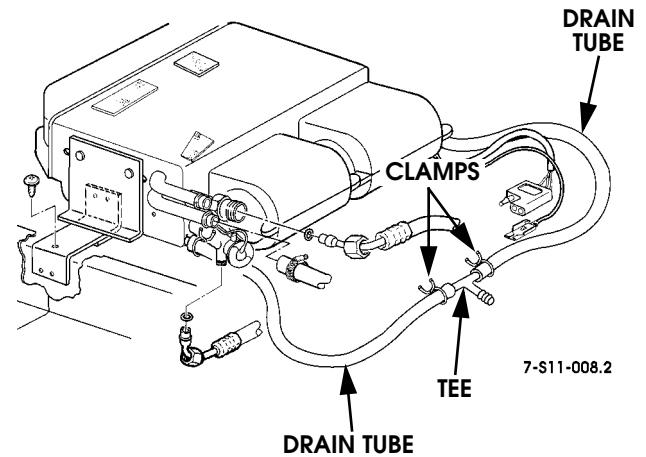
Auxiliary A/C Drain Tube Replacement
